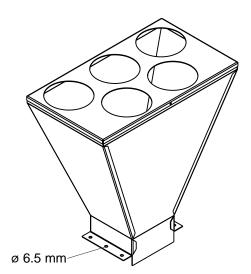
Dimensioned sketch, inlet funnel five feed components.
